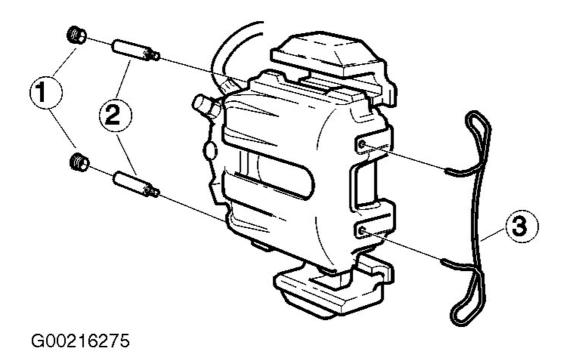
Removing Front Brake Caliper Courtesy of VOLVO CARS OF NORTH AMERICA.
